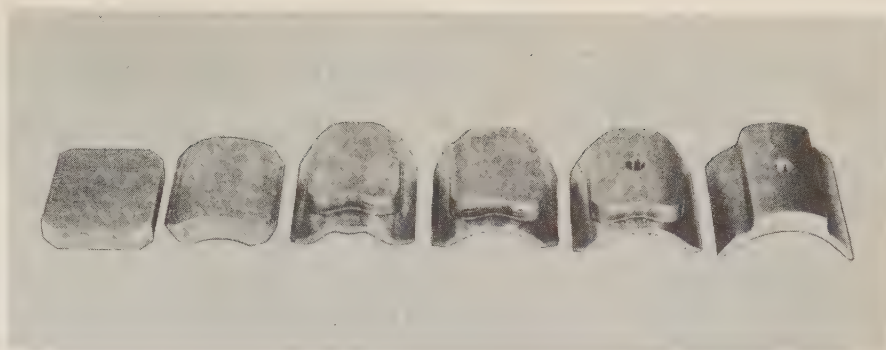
Pole shoe is produced by swaging method from a flat, rectangular piece of steel. Final coining operations yield thickness tolerance of .002 in.
